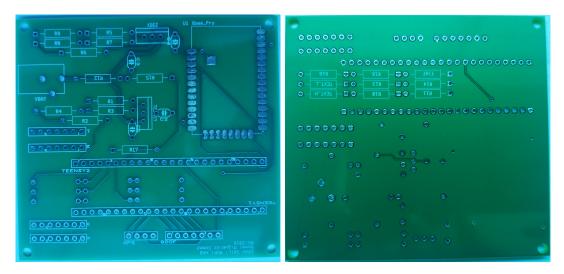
Design 4 - Payload Printed Circuit Board: (L) Top and (R) Bottom Face.
